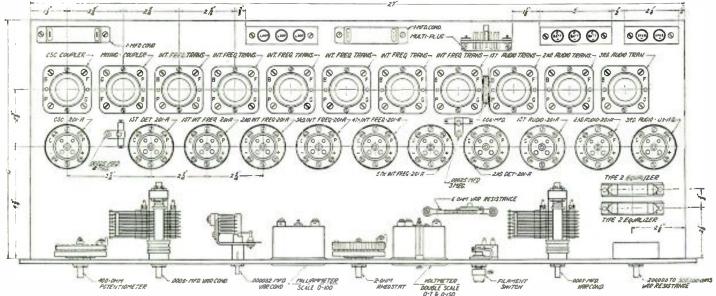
Raseboard layout giving exact dimensions for placing of all parts before starting wiring
